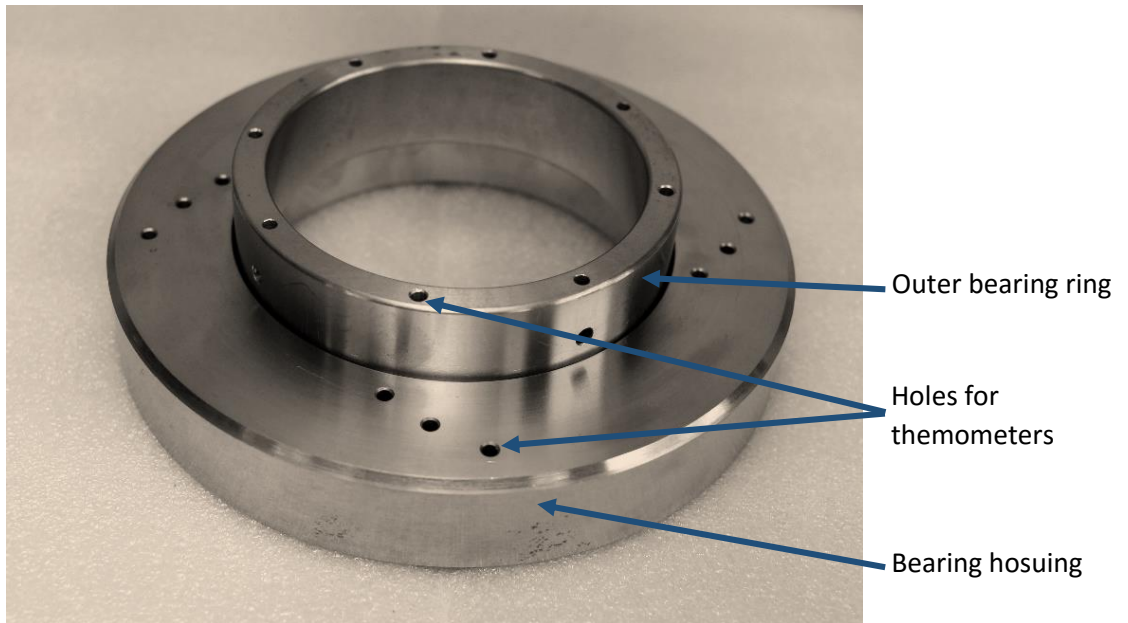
Photography of the semi assembled simulated bearing ring and its housing
